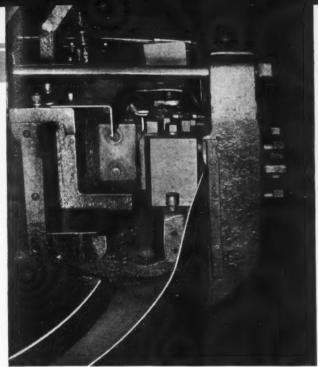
Modified Thread-rolling Machine in which the Stem of the Hot Extruded and Coined Valve is Straightened
